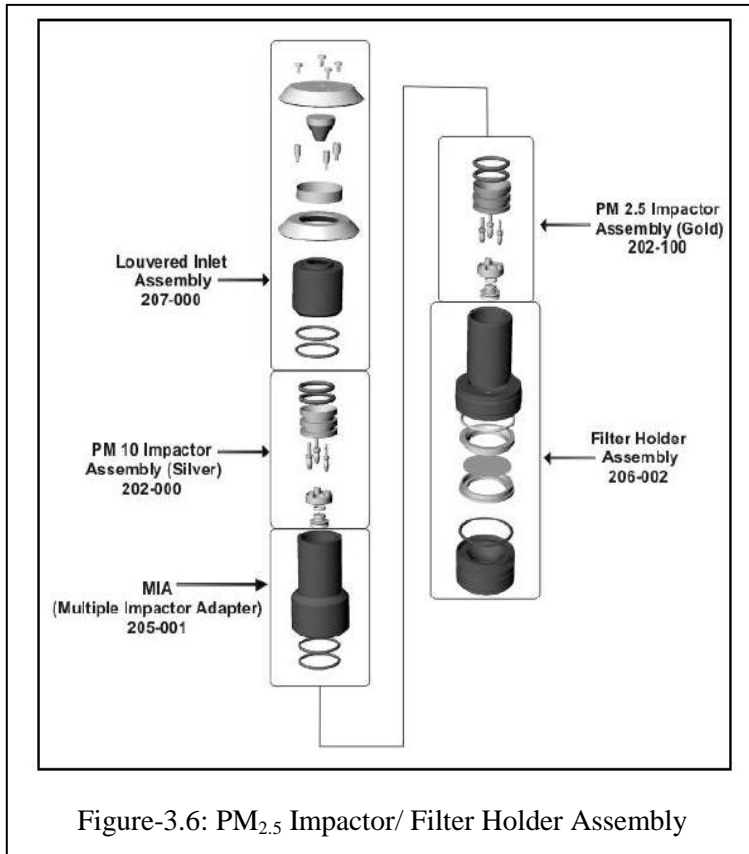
PM_{2.5} Impactor/ Filter Holder Assembly
